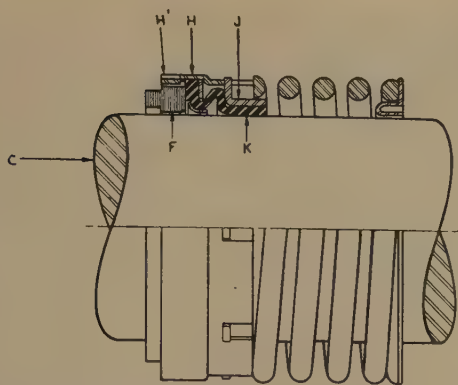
SYNTHETIC RUBBER BELLOWS (k) ADHERES TO SHAFT (c) AND DRIVES DRIVING BAND (j) WHICH DRIVES RETAINER SHELL (h). DRIVING NOTCHES h' IN RETAINER DRIVES WASHER (f)
